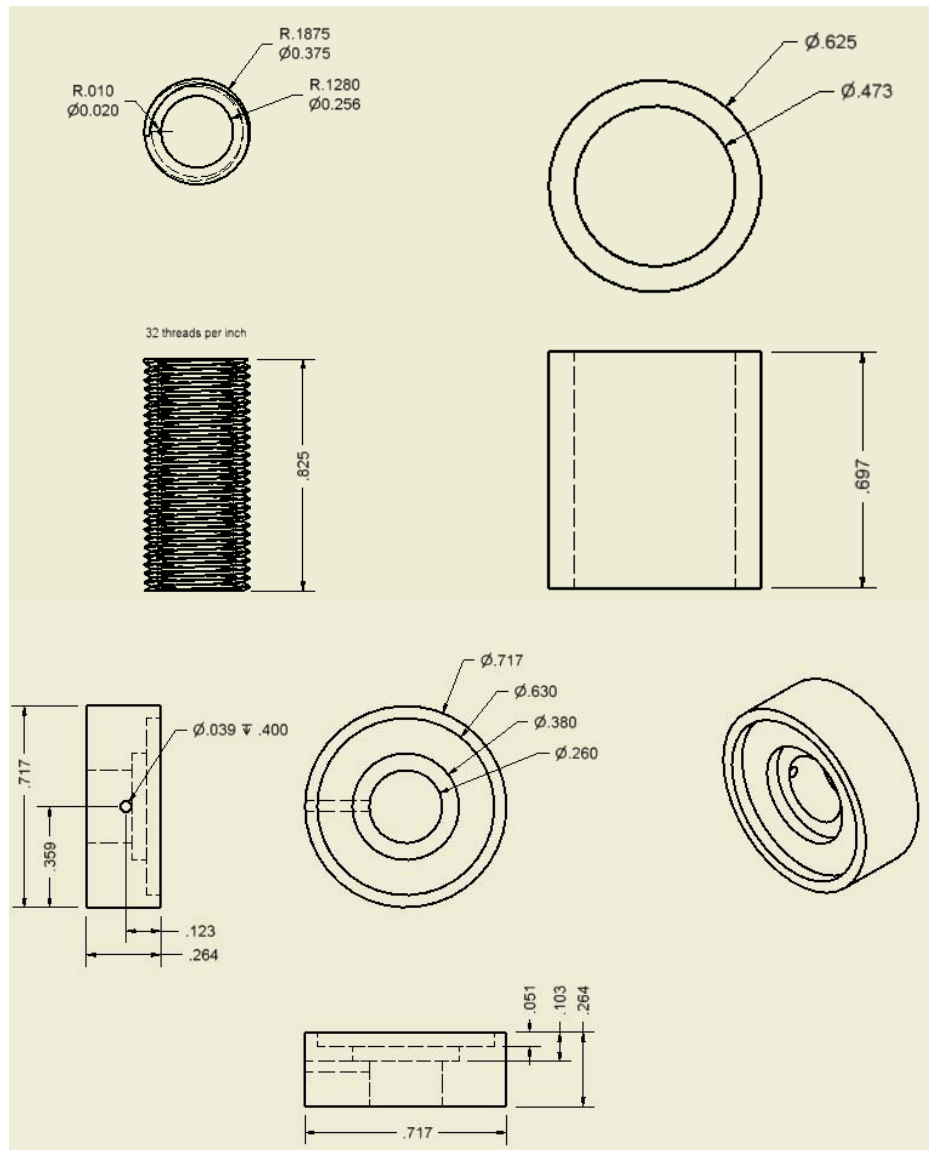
The mechanical drawings of the furnace parts. All the parts are made out of macor, except for the inner core, (the threaded part in the drawing) which is made of alumina. When building the furnace, the nichrome wire (wire gauge sizes ranging from 28 to 36) is wrapped around the threading on the alumina, then cemented into place using high temperature stove and gasket cement (available at hardware stores). The rest of the housing is placed and cemented into place afterward.
